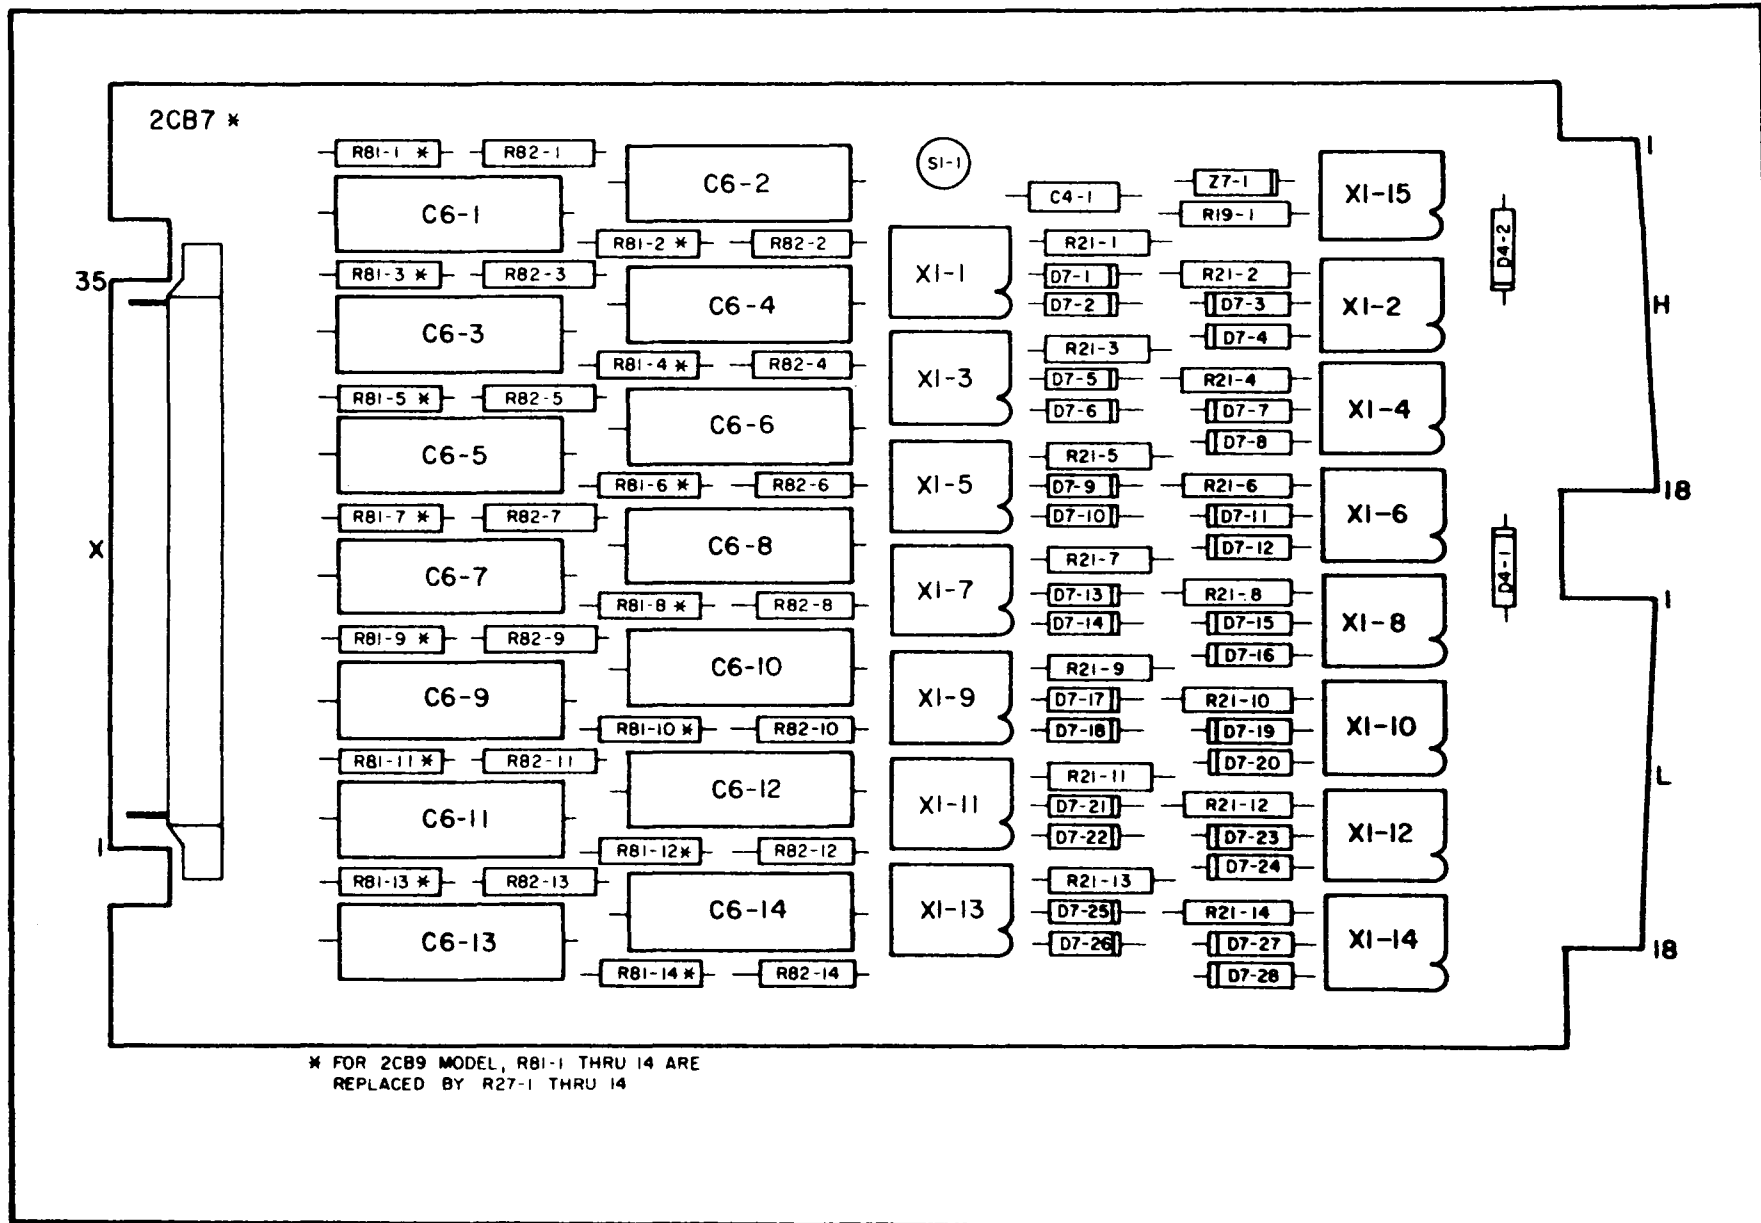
2CB7/2CB9 ASSEMBLY (REF. DWG. 743A356, SUB 10)
